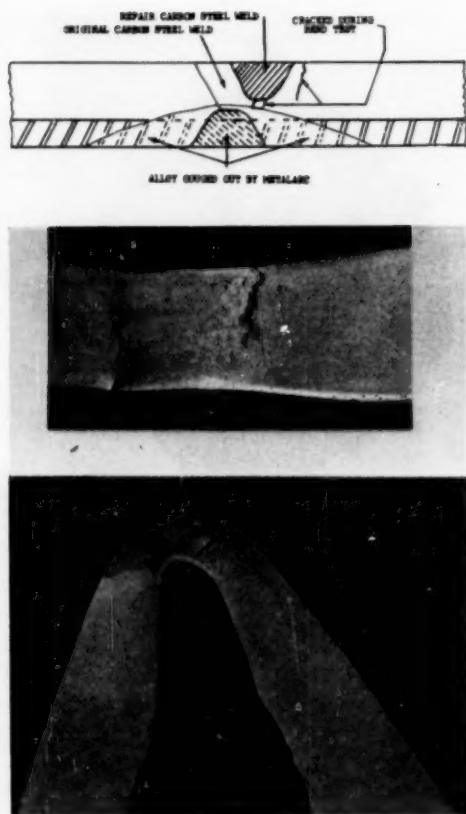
REFINERY A—SKETCH AND PHOTOGRAPHS OF A TEST REPAIR WELD
